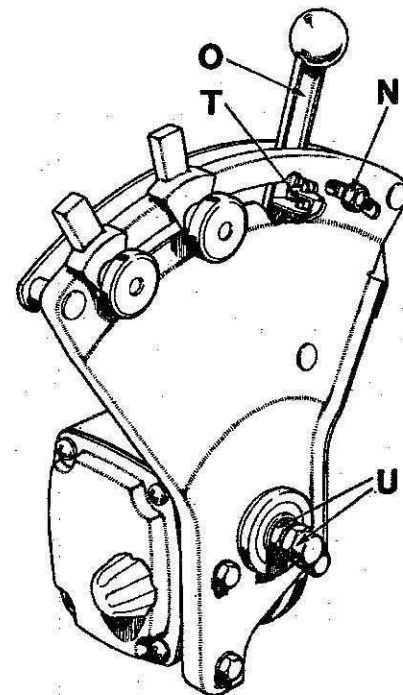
Hydraulic system control lever adjusting points; refer to text for procedure.
